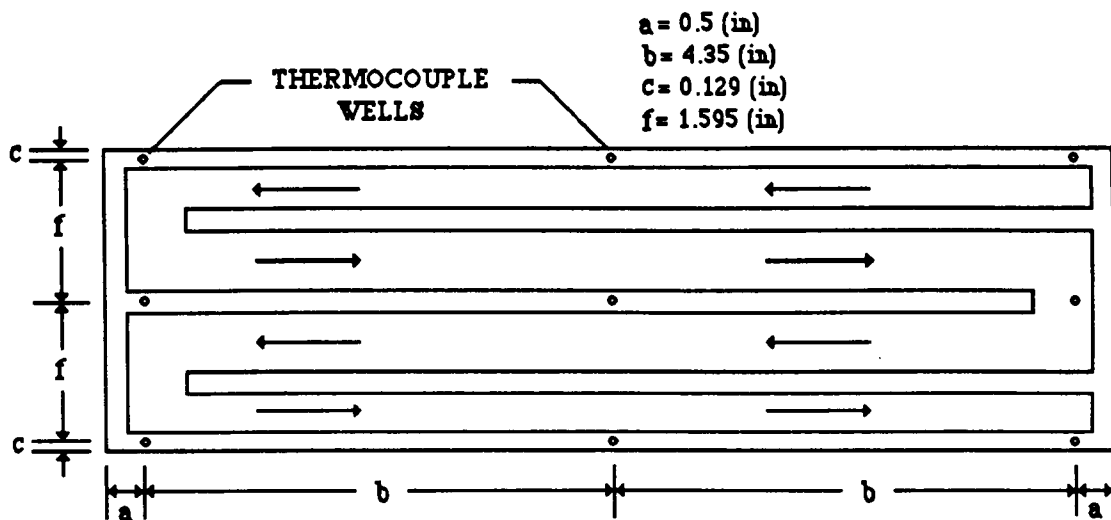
Cross-Sectional Views of the Isothermal Vertical Walls of the Test Enclosure
